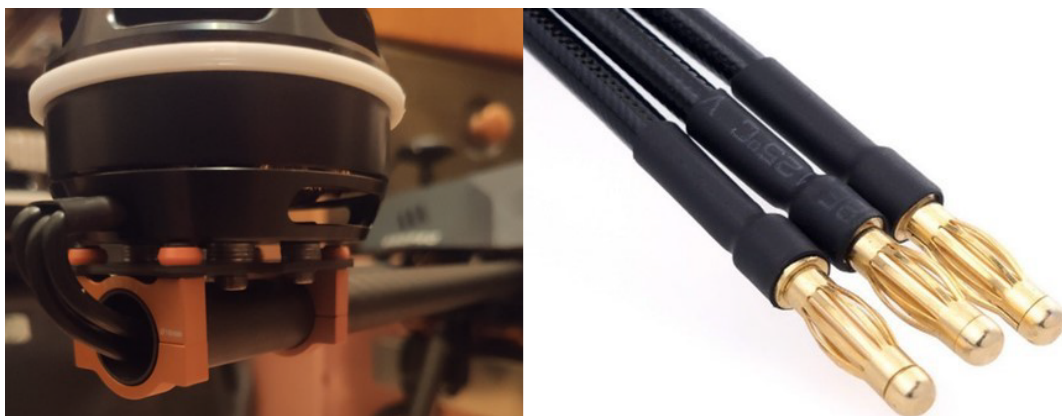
STEP 3. DETAIL OF THE MOTOR MOUNTING SOLUTION (LEFT); MOTOR CONNECTORS (RIGHT)
